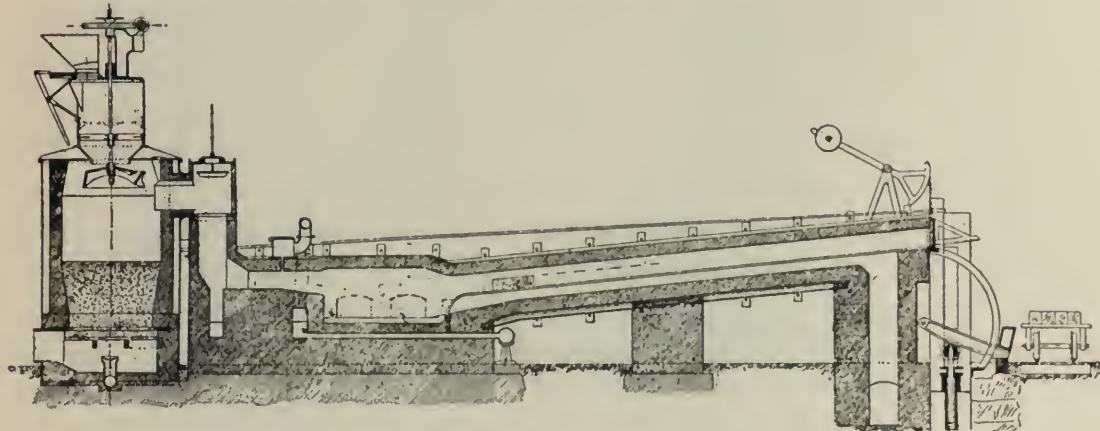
Bildt's Producer combined with Re-heating Furnace.
